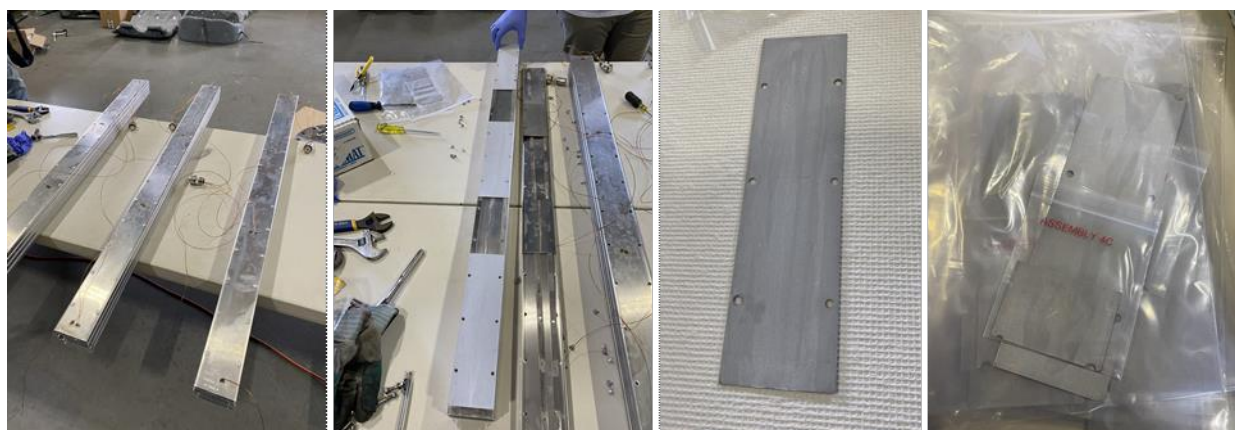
Post-test photo series showing mock ASNF disassembly handling and packaging of corrosion surrogate test plates before analysis.
